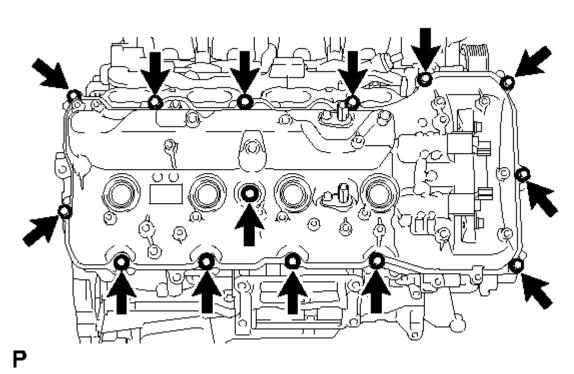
Identifying Remove Cylinder Head Cover And Bolts RH
